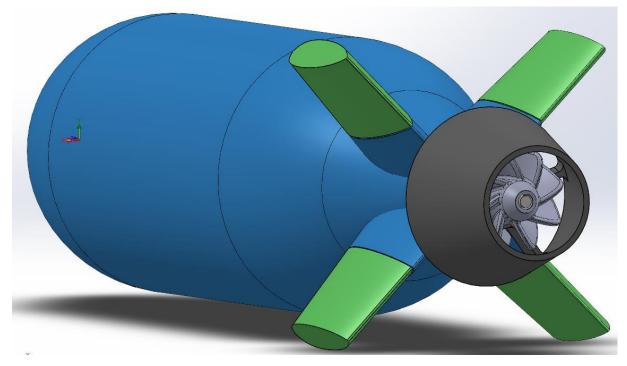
Rear isometric view showing the propeller inside the diffuser.
